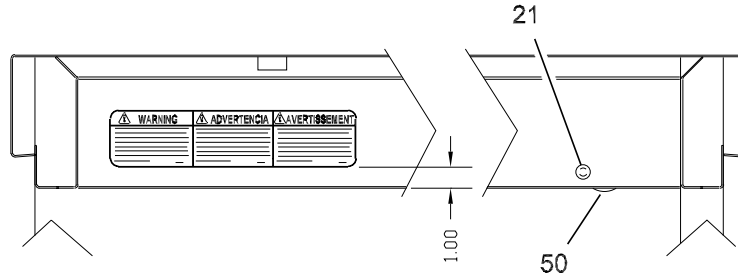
CAB ASSEMBLY (SHEET 3 OF 6)
